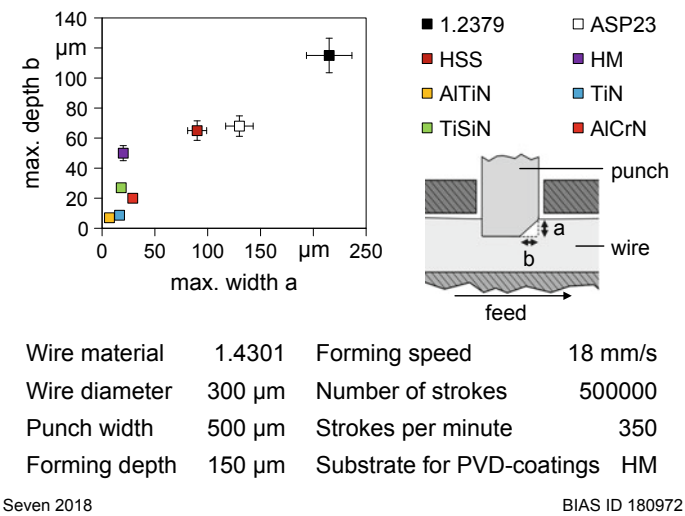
Tool wear of different tool materials with and without coating after 500,000 strokes
